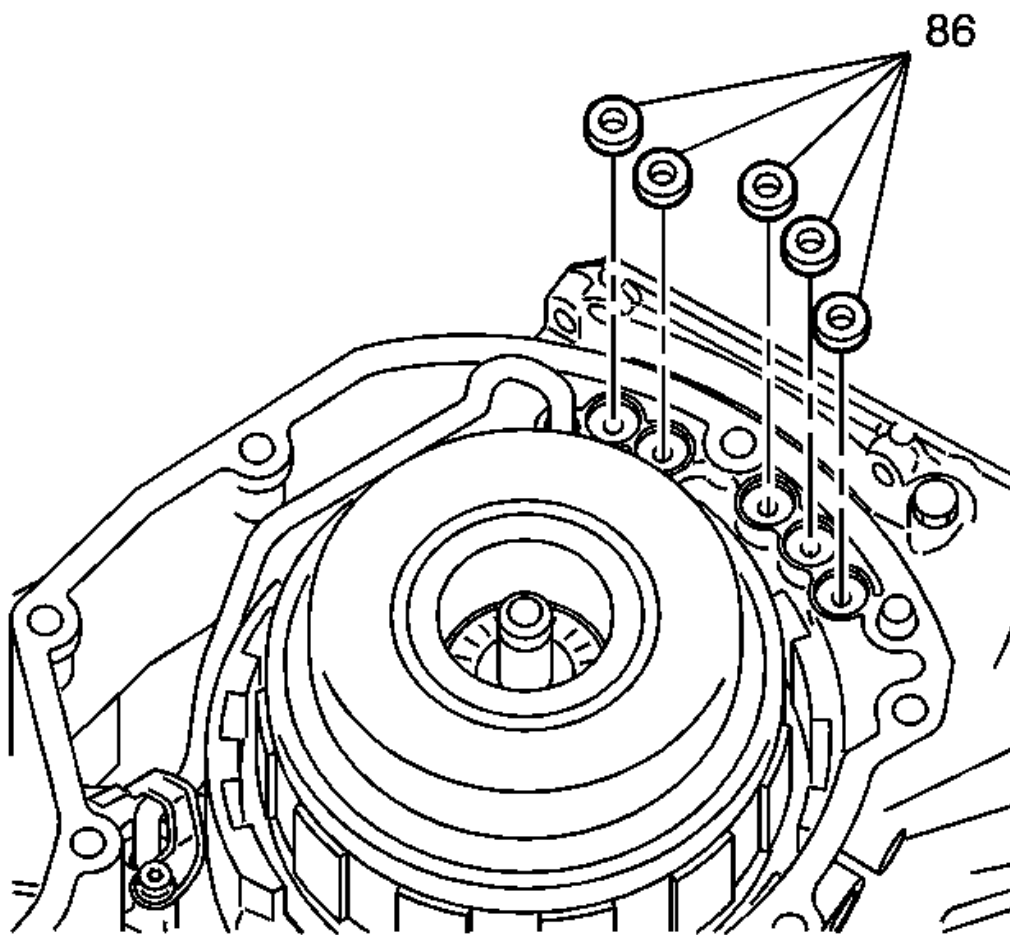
Control Valve Channel Plate - Upper Body Spacer Plate Side
